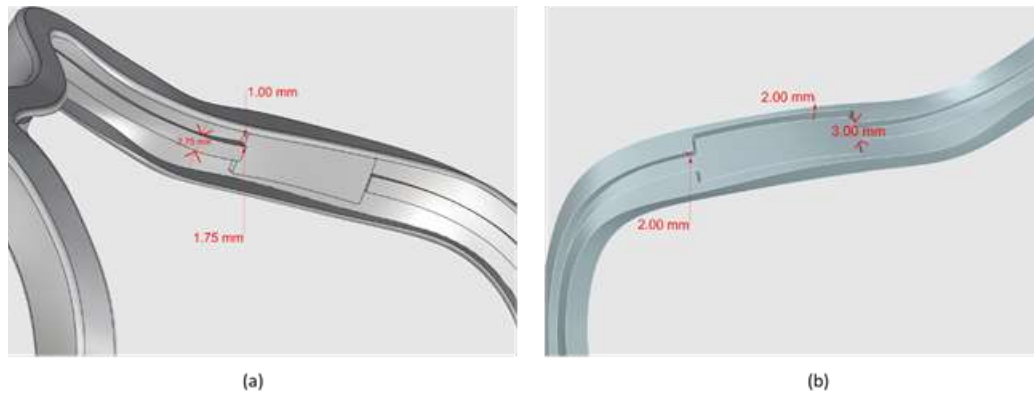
Close-ups of inside views of digital prototypes. (a) Base Frame (b) Covering Piece.
